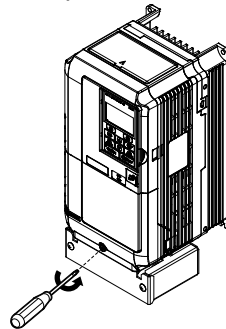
Removing the Terminal Cover on an IP20/NEMA Type 1 Enclosure Drive
